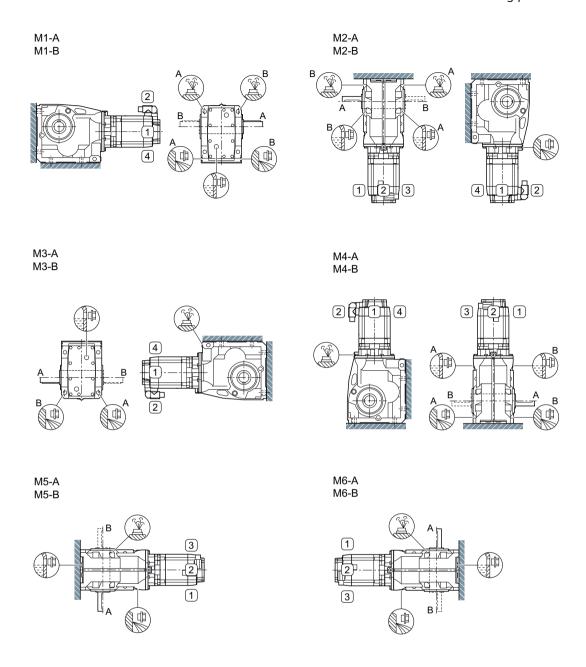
Mounting positions for servo bevel geared motor K, foot-mounted design, frame sizes 39 - 149, 3 stage
